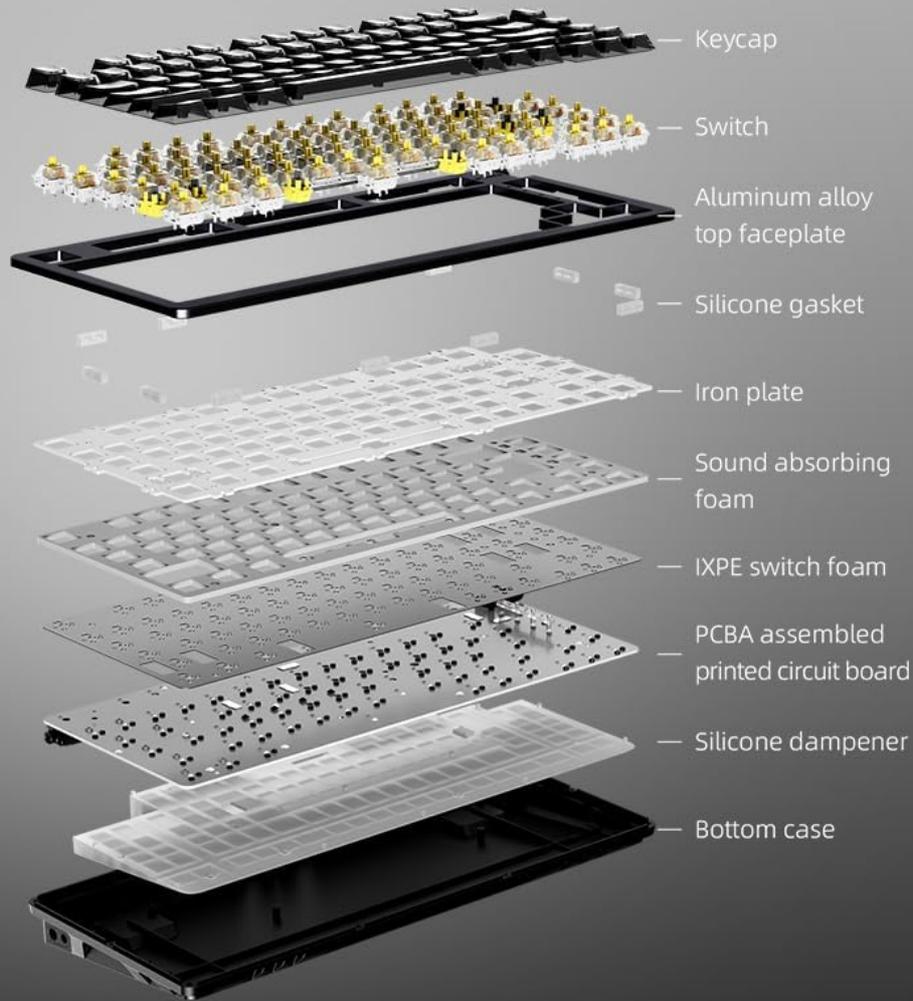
Internal structure of the FiiO KB3, illustrating the multi-layer gasket mount design for enhanced typing feel and sound.
